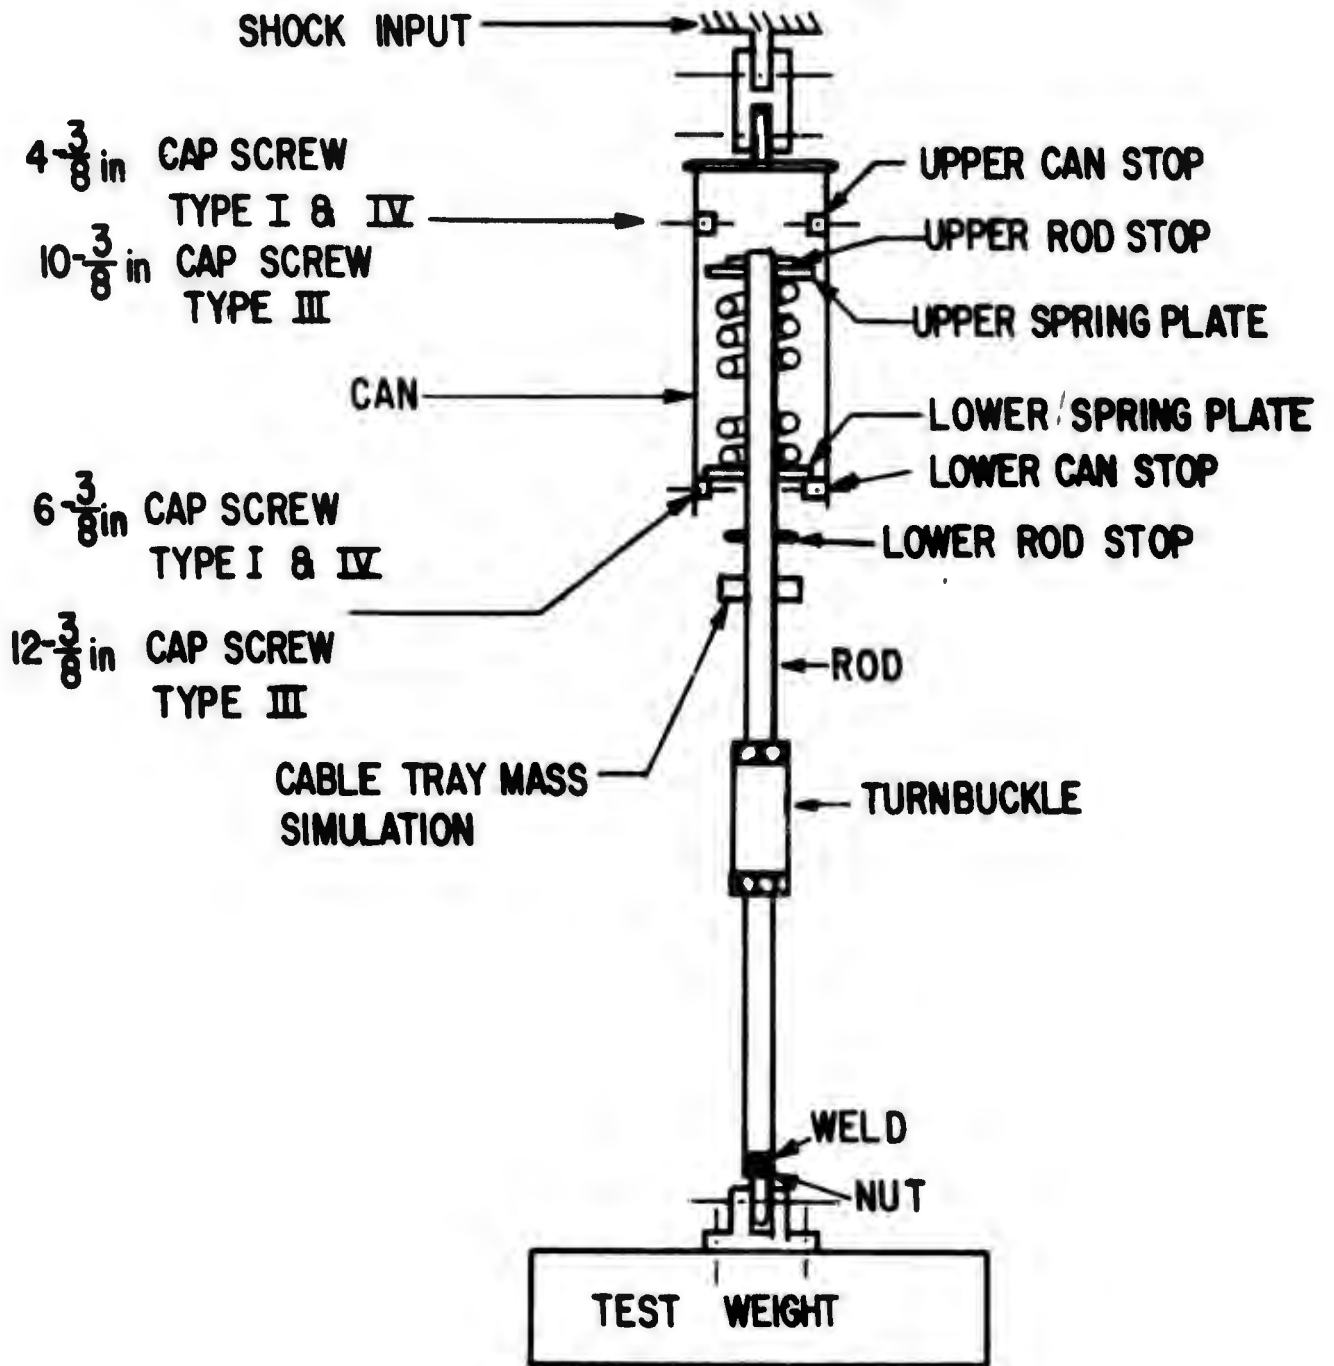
Wing I, LER Isolator Assembly in Test Configuration
